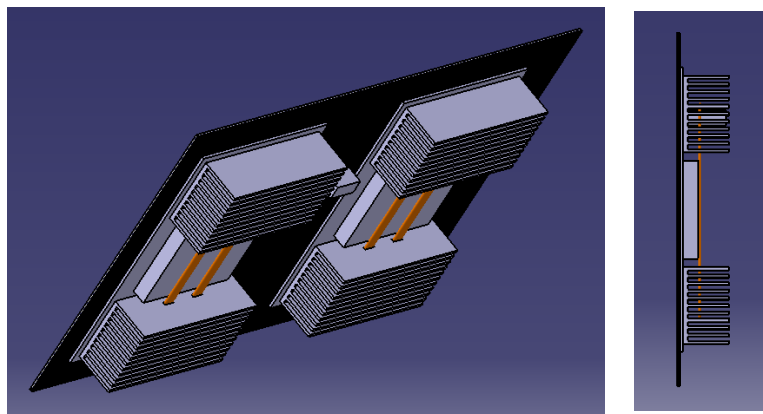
The design of passive cooling (integration of Heat pipe and heat sink)
